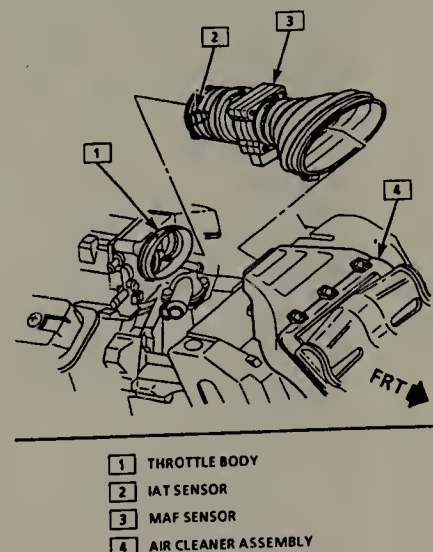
On many later model vehicles, the air intake duct must be removed in order to access the air cleaner assembly
